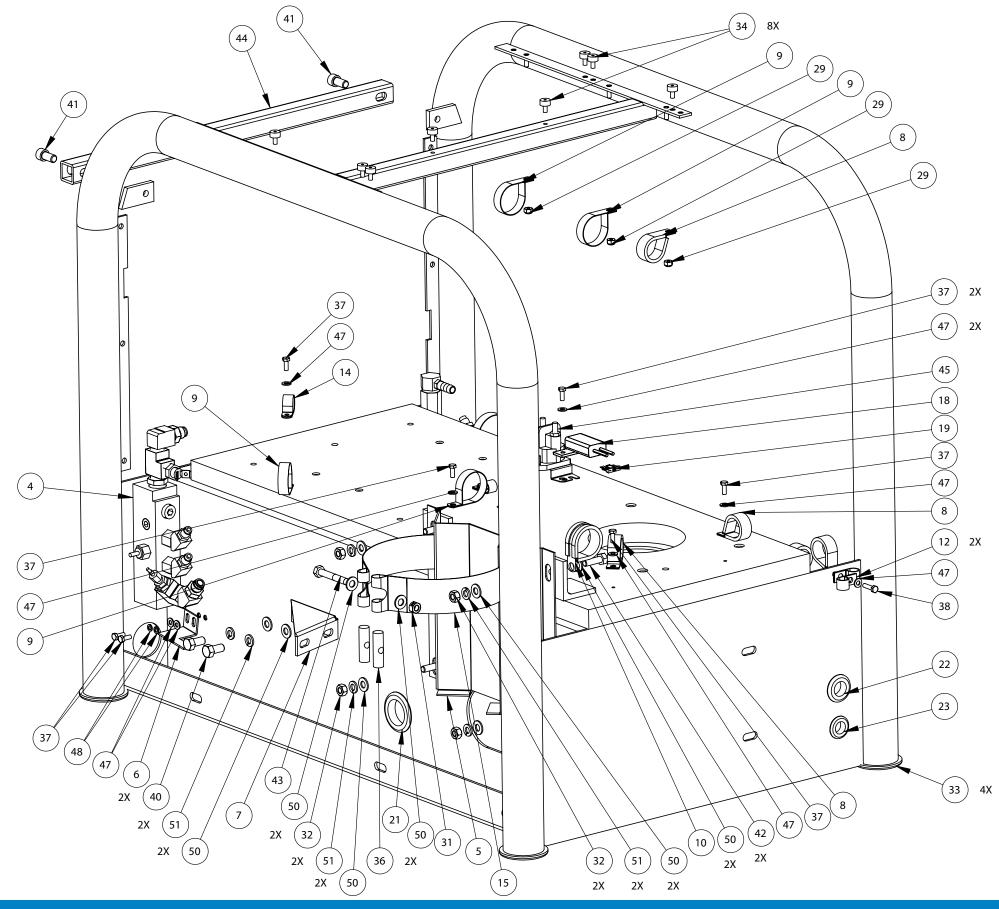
Frame Assembly - View 3 of 3 610-001-720 Rev. K
